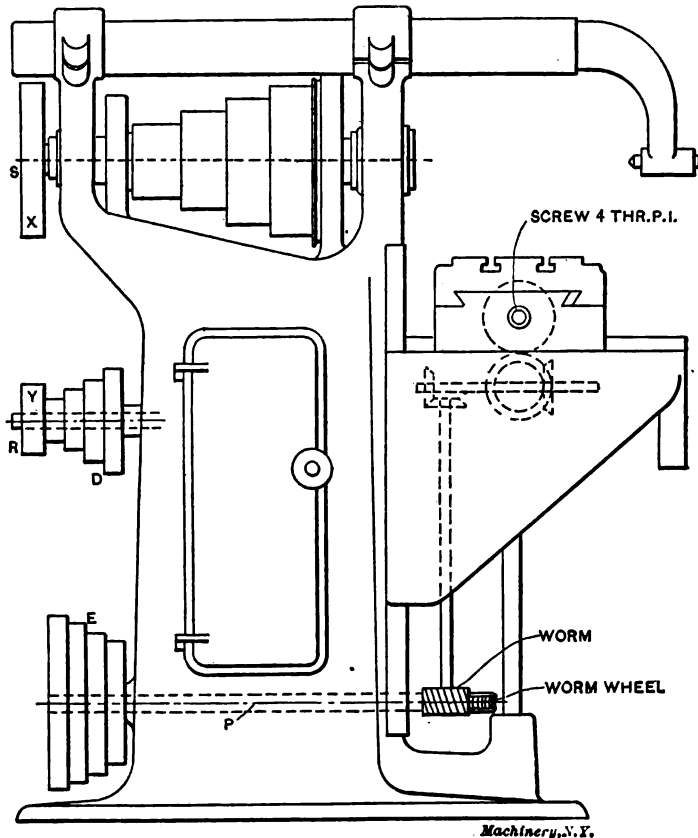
General View of Milling Machine, having Cone Pulley Feed
